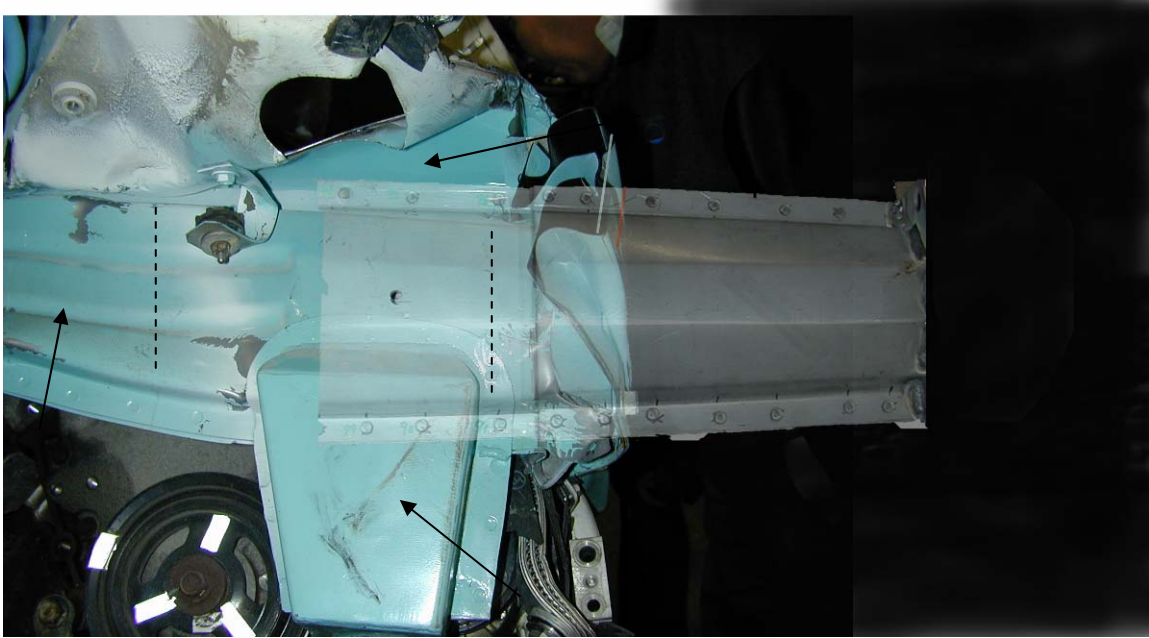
View showing right-hand rail assembly with phantom view of original rail superimposed. Dashed lines are approximate location of the laser-welded blank joints.
